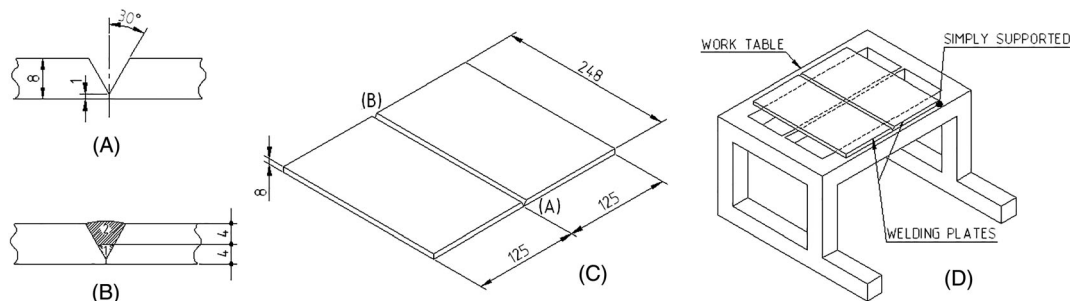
Dimensional details of plates and boundary conditions used during the welding process in the experimental test
